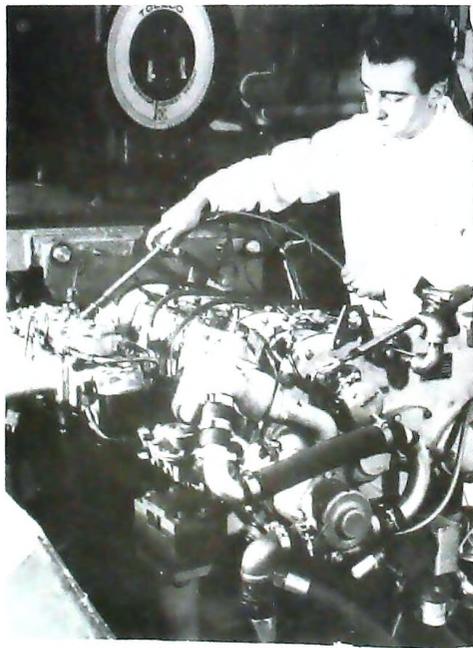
RC4-60 engine, three-quarter rear view, carburetor side.
